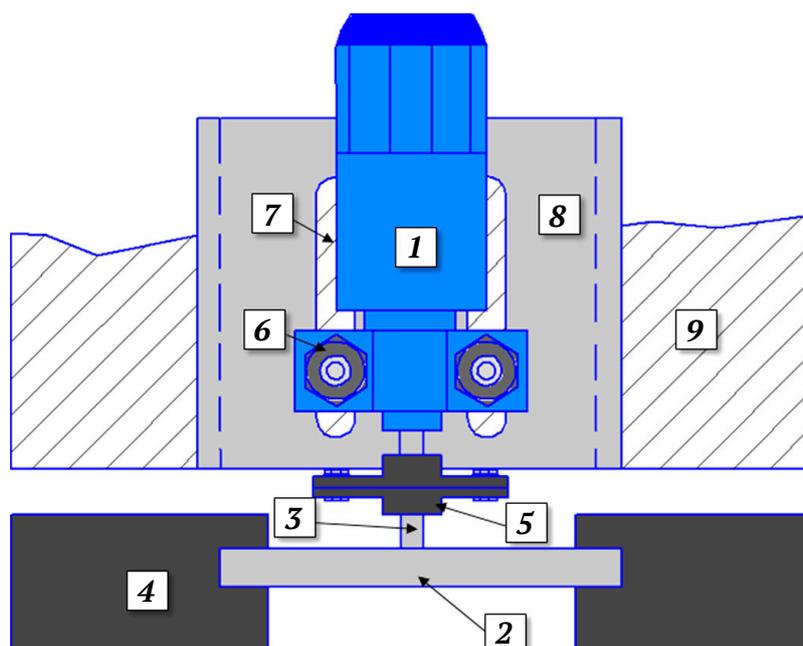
Collection and loading unit: 1 – gear motor; 2 – disc; 3 – shaft; 4 – arm; 5 – coupling; 6 – bolted connection; 7 – slotted hole; 8 – channel section; 9 – side of the conveyor frame
